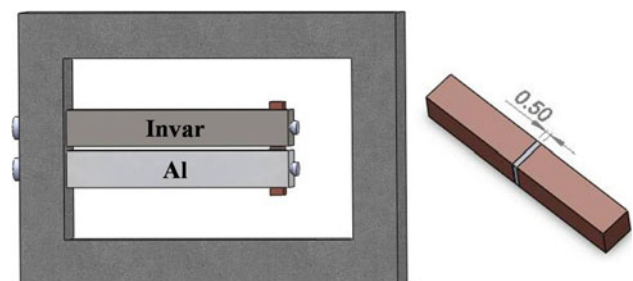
Bimetallic loading frame and solder joint sample for TMC test
